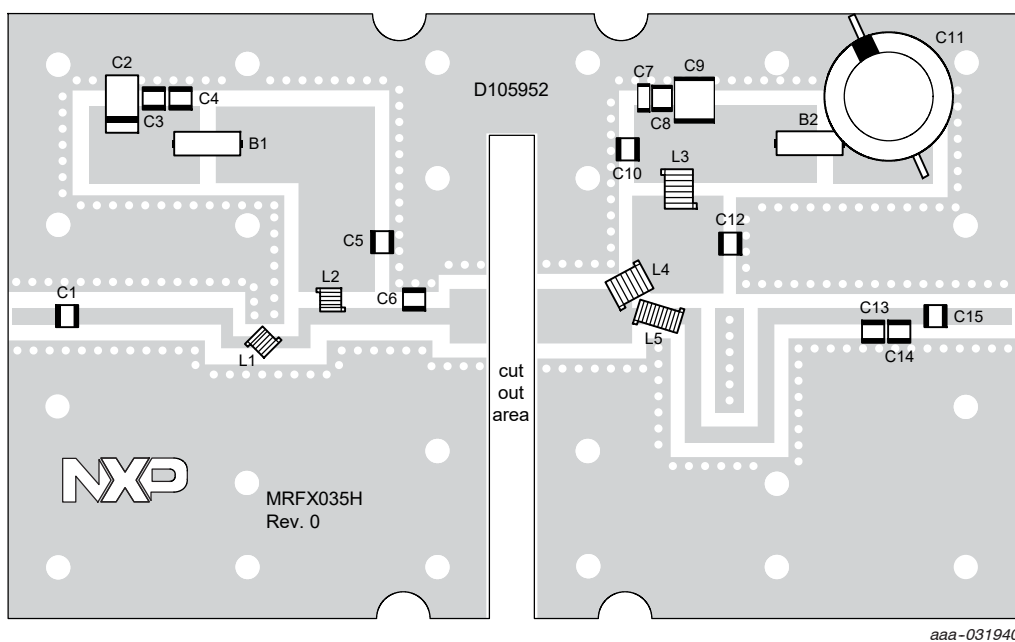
MRFX035H Production Test Fixture Component Layout — 230 MHz
